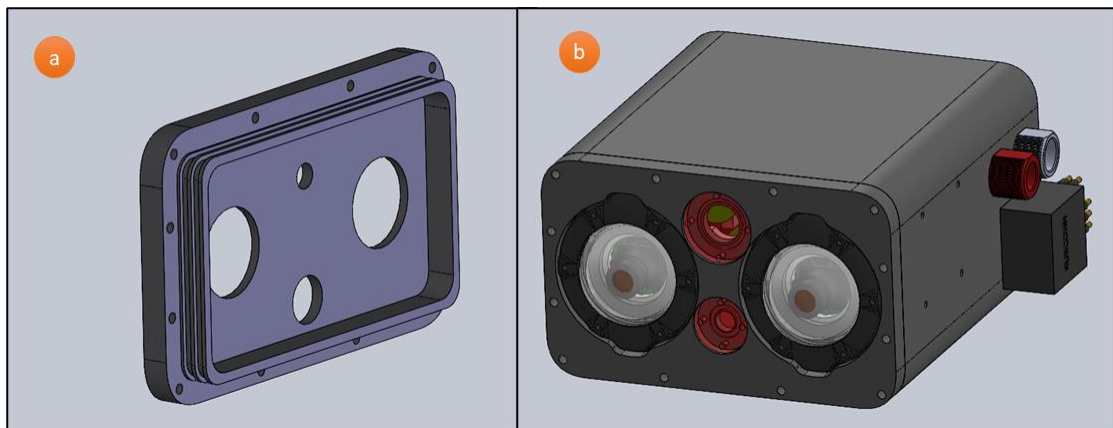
Initial design for the second version of the MARESyE; a: Lid backside, b: IPSH full assembly.
